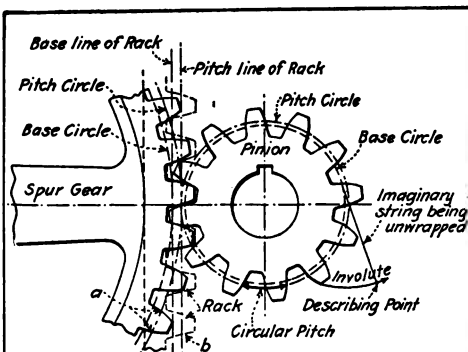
PAIR OF SPUR GEARS - SHOWING TOOTH SURFACES FORMED FROM INVOLUTE CURVES
